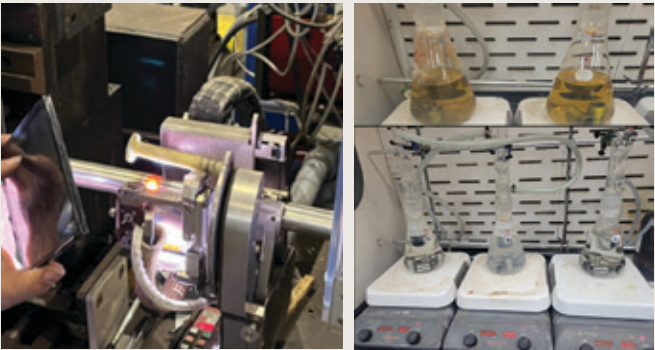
Automatic orbital welding and Corrosion test.
